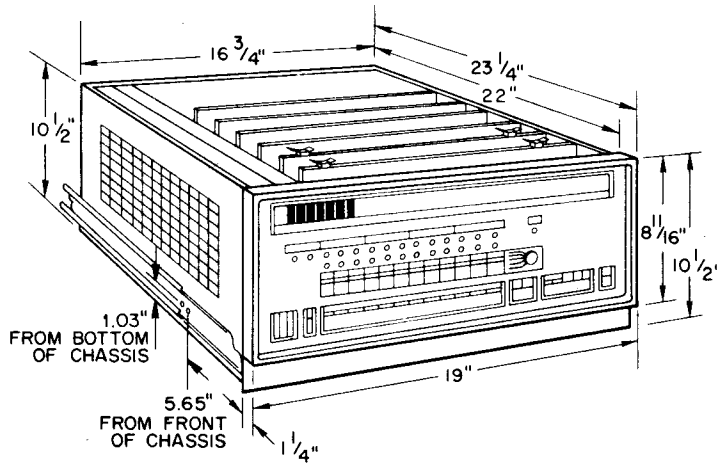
Rack-Mounted PDP-8/E Dimensions
